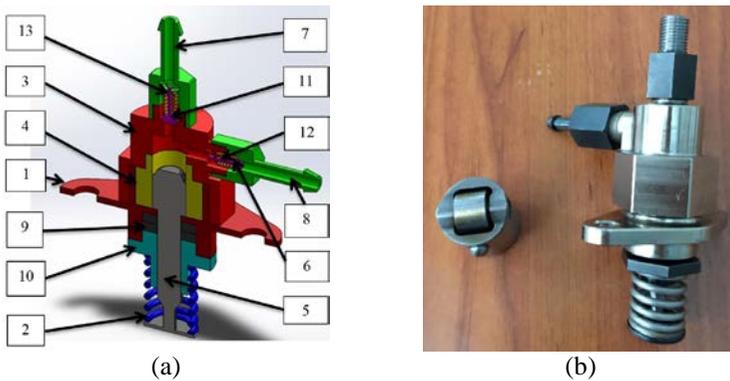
(a) Cross section view of the pump and (b) the physical features of the pump
